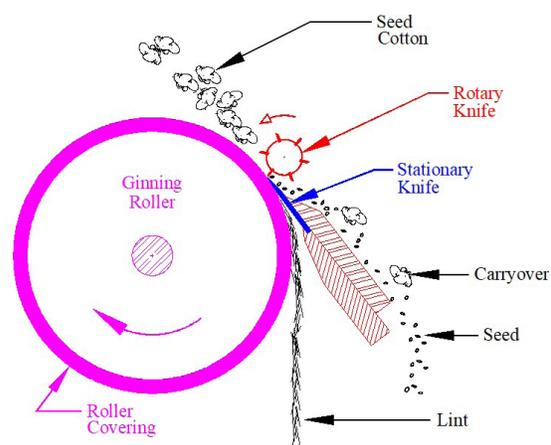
Conventional roller gin stand (Armijo et al., 2006a).
